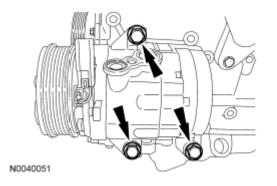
Locating A/C Compressor Bolts Courtesy of FORD MOTOR CO.
